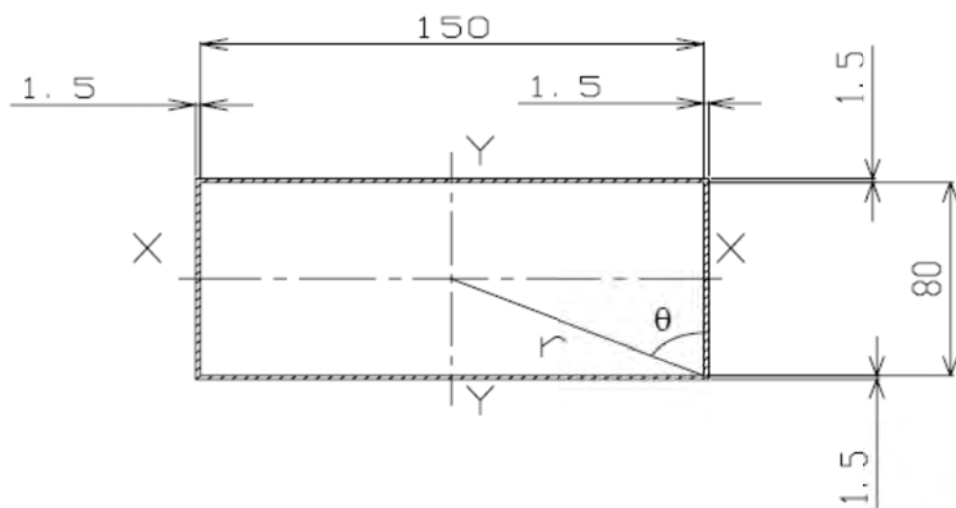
Sling Fitting Weld Geometry for Attachment to Support Plate
